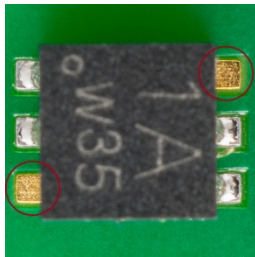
DFN2020MD-6 (SOT1220) with tin-plated wettable side pads (3-D160): Solder paste printing with fails
